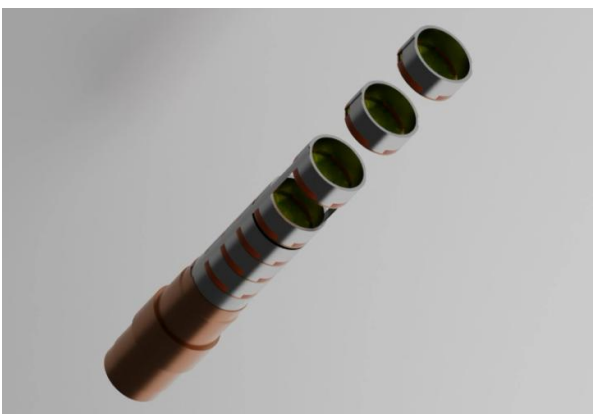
Exploded view of stack showing circular PCBAs and metallic rings.
